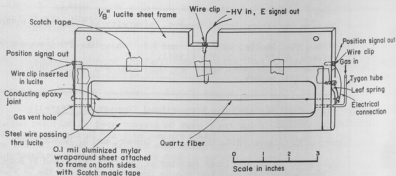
Assembly Drawing of Inner Counter Assembly
